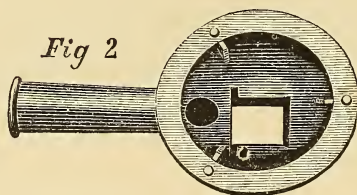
represents the lower half of tuyer, showing opening for air valve and rests for gauge plate.
